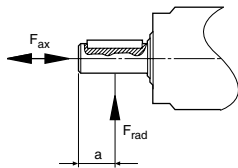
Load on output shaft for basic motor with keyed shaft.
